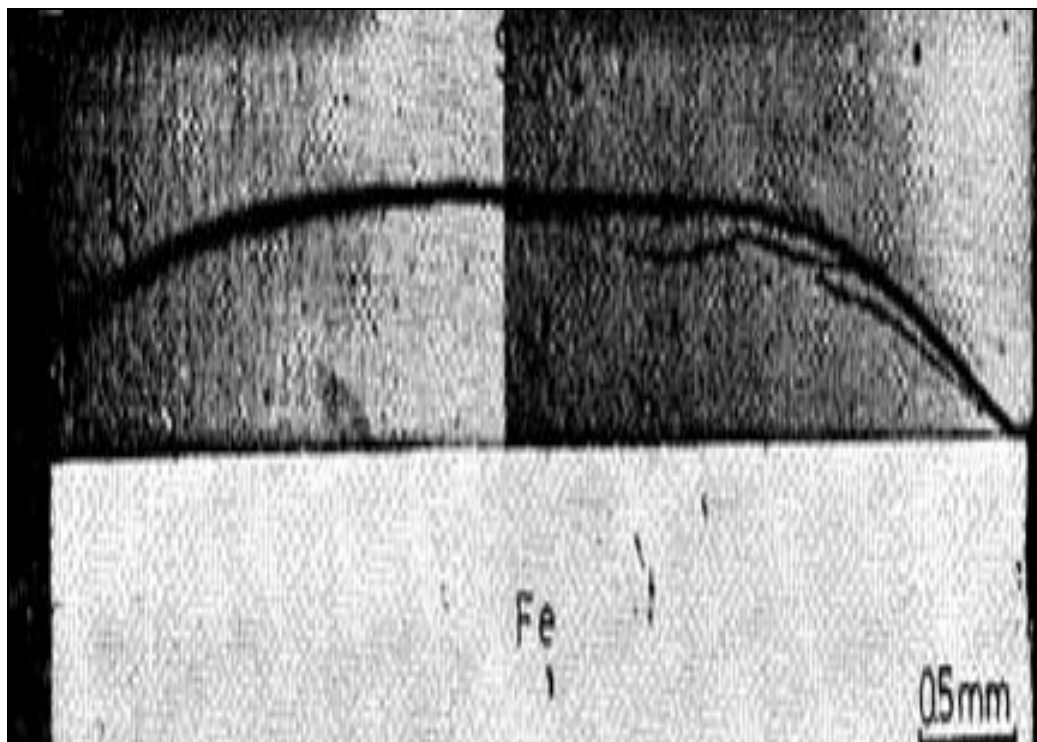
Example of typical fracture occur in ceramic/metal joint [12].
